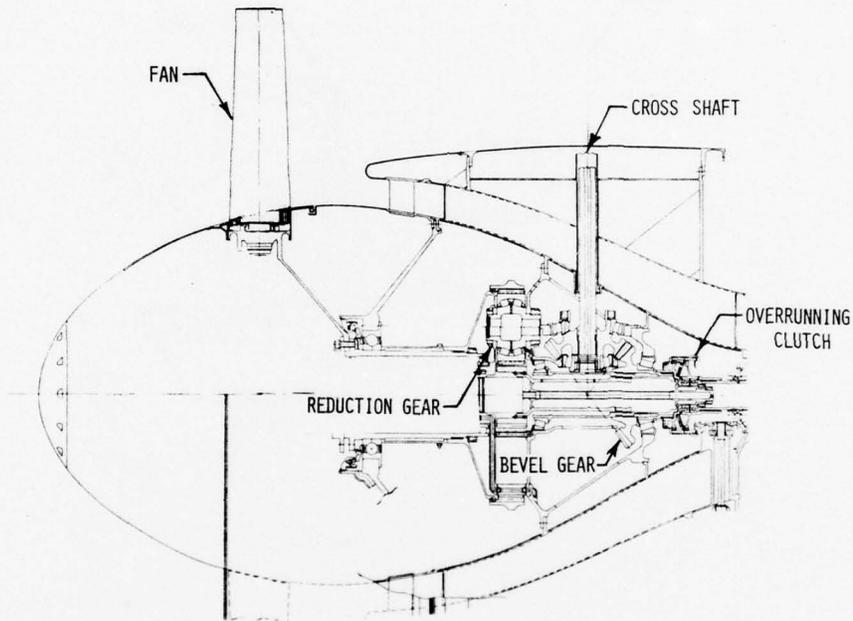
Bevel Gear and Cross Shaft Located Aft of Reduction Gear
